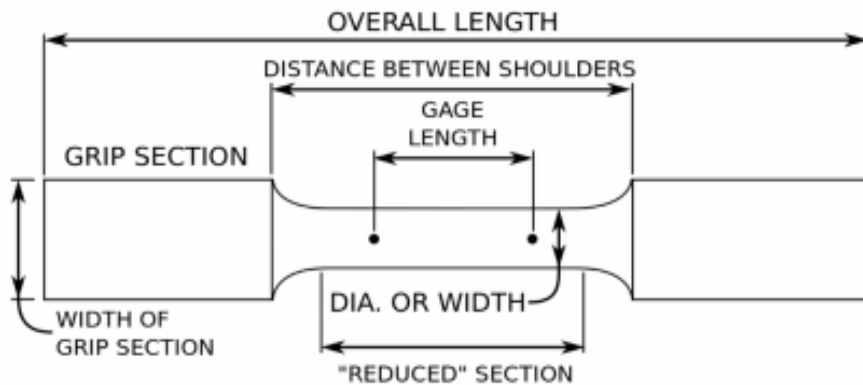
tensile test specimen standard dimension (Davis, 2004 and Jiru et al., 2022)
